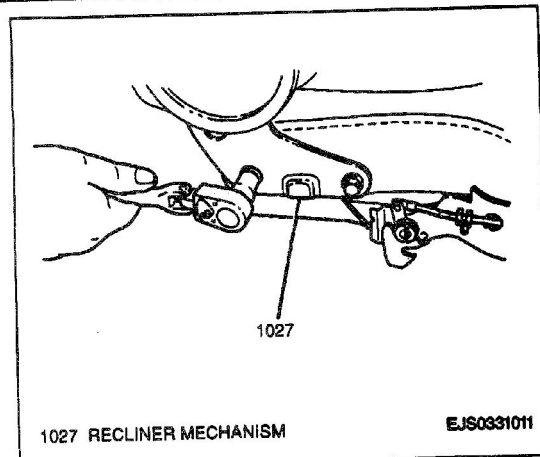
Removing Recliner Mechanism Rear Bolt—Four - Door Models
